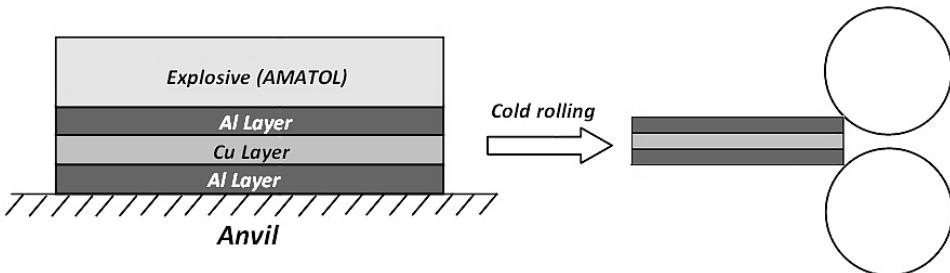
Schematic view of parallel arrangement of explosive welding and cold rolling process.
